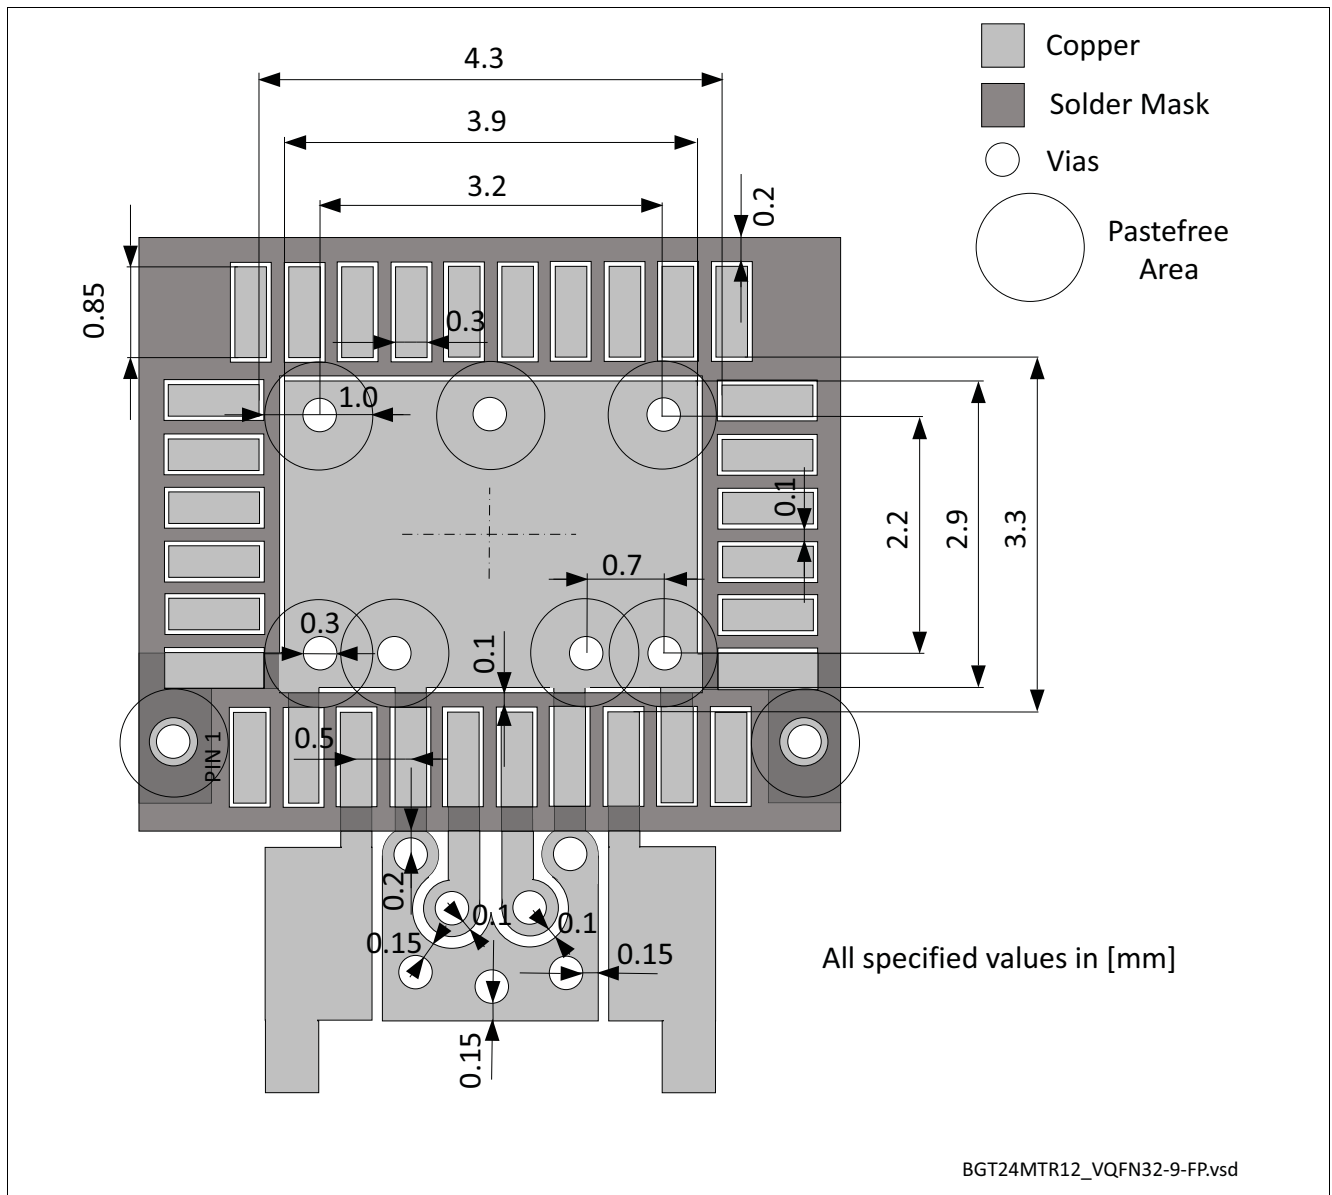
Recommended Footprint and Stencil Layout for the VQFN32-9 Package
